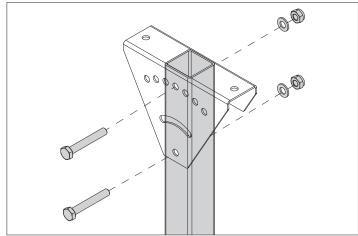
Drill the holes in the support leg (ceiling mounting).
